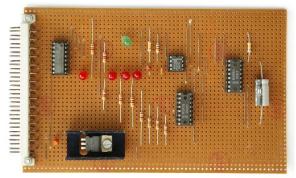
Example use of stripboards with solderable copper strips on the back [80].
